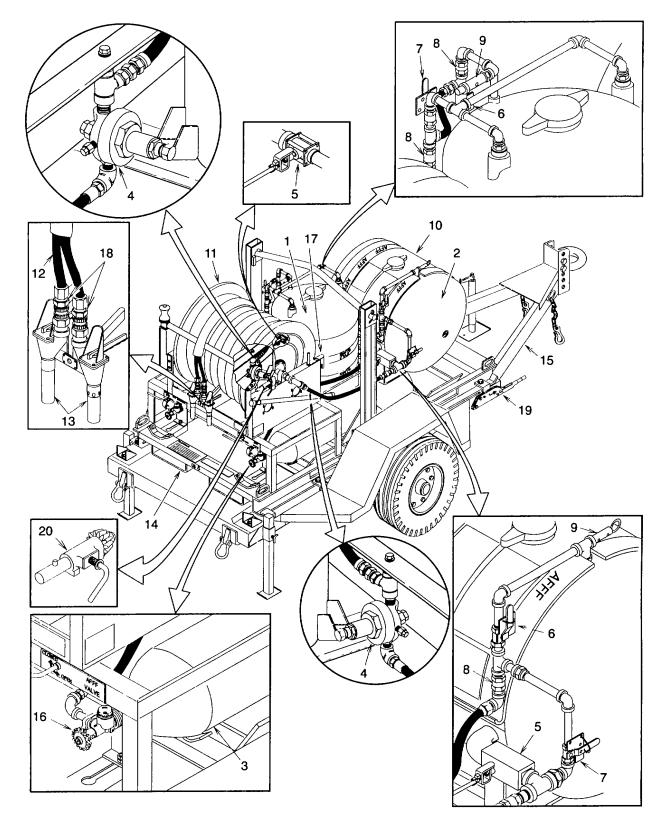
Location and Description of Major Components for Trailer Mounted Extinguisher Assembly
